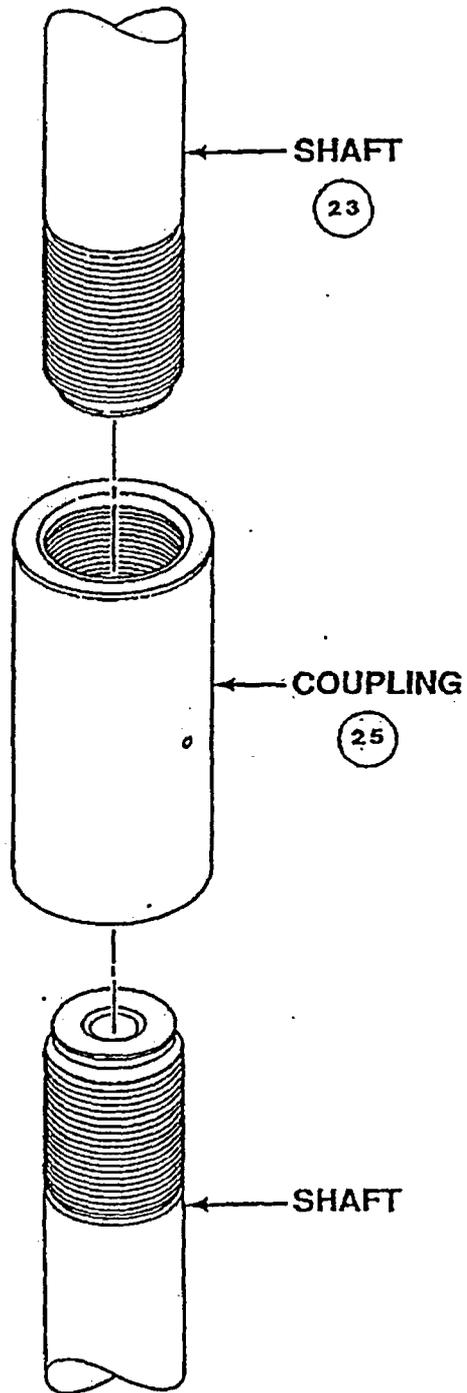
SHAFT COUPLING ASSEMBLY (TYPICAL)
